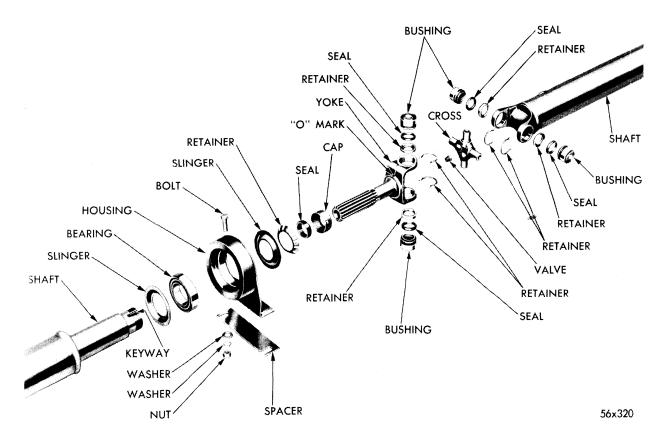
Propeller Shaft and Center Bearing Assembly (Disassembled View)
